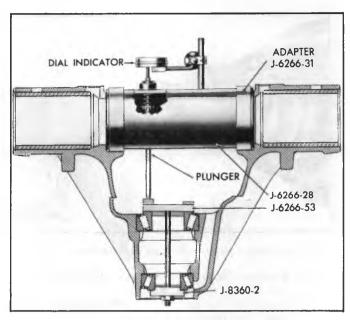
B-Installed View of Pinion Depth Gauge (Heavy-Duty Passenger Axle)
